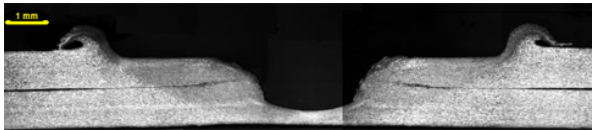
Macro cross-section of a spot friction stir weld of Al611-T6.
